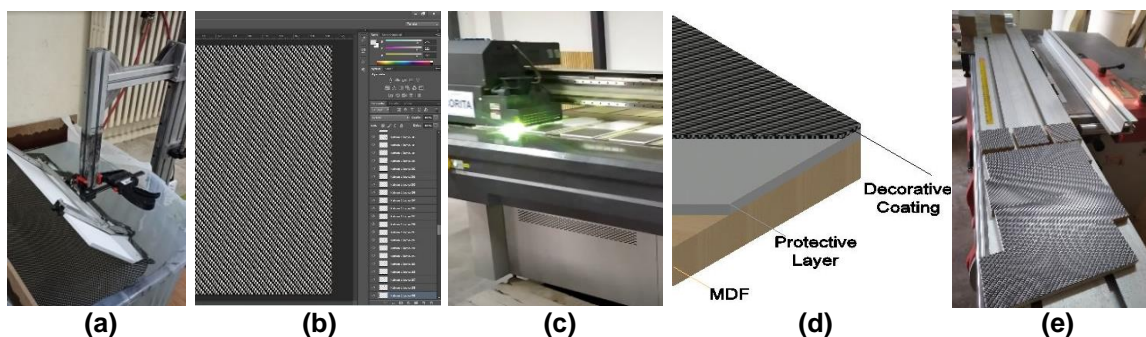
(a) WTP process, (b) Carbon pattern design, (c) UV printing, (d) WTP coated sample plates, (e) Cutting of WTP and UV printed samples.
